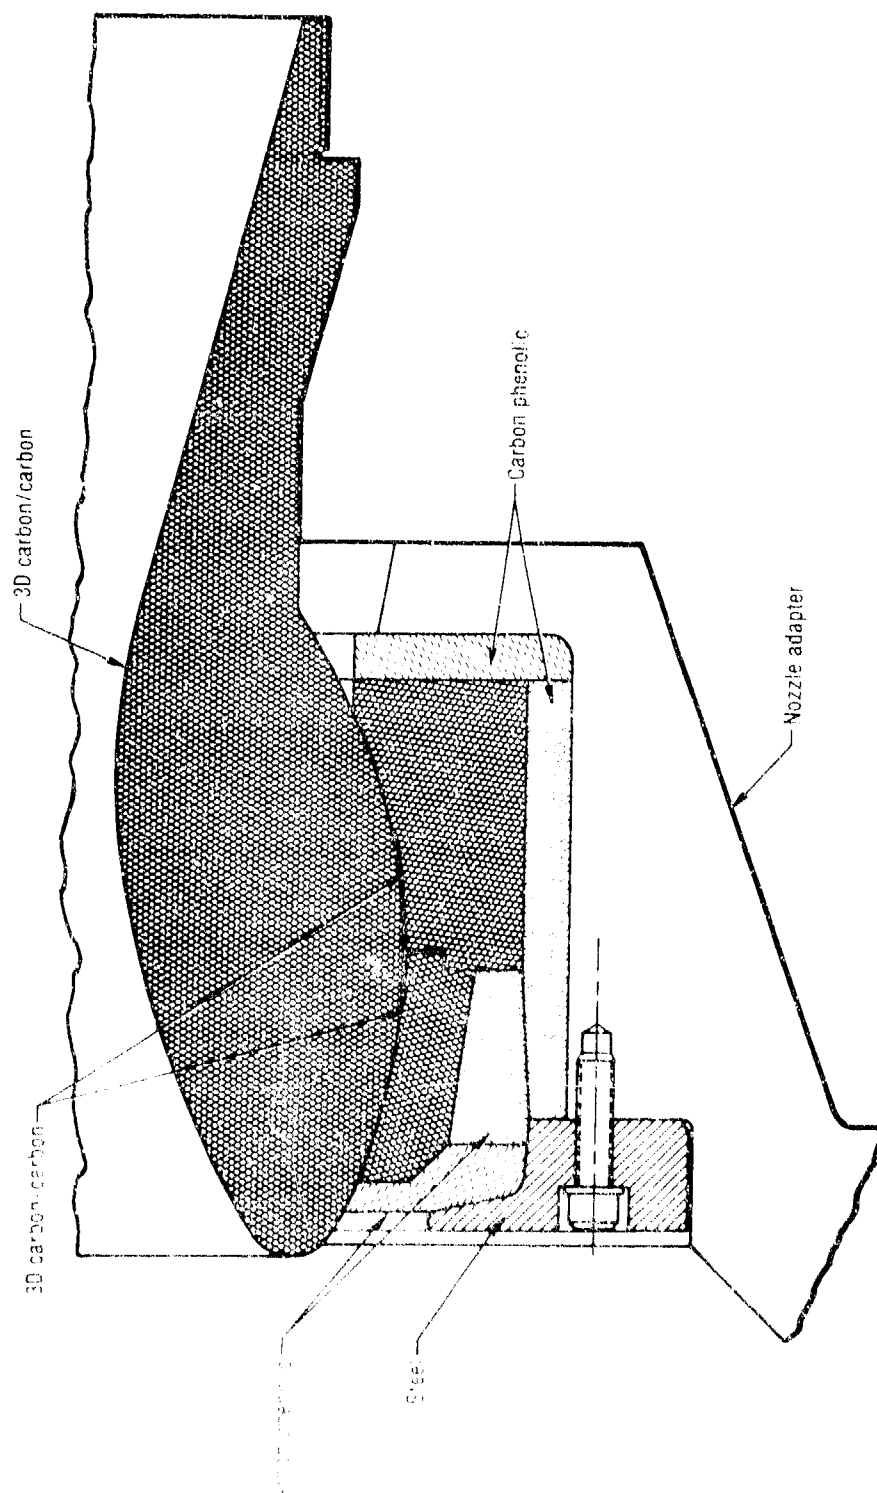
Nozzle Subassembly, as Redesigned Following Bench Test Failure
